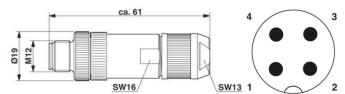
Connector M12 x 1 straight, shielded; pole arrangement:male M12, 4 pins, A-coded, view of male connector side
